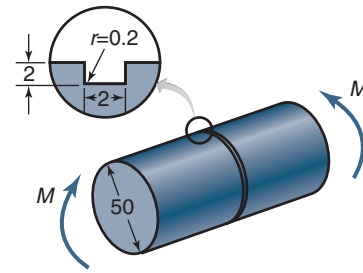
Round shaft with a retaining ring groove considered in Example 7.5. All dimensions are in millimeters.
